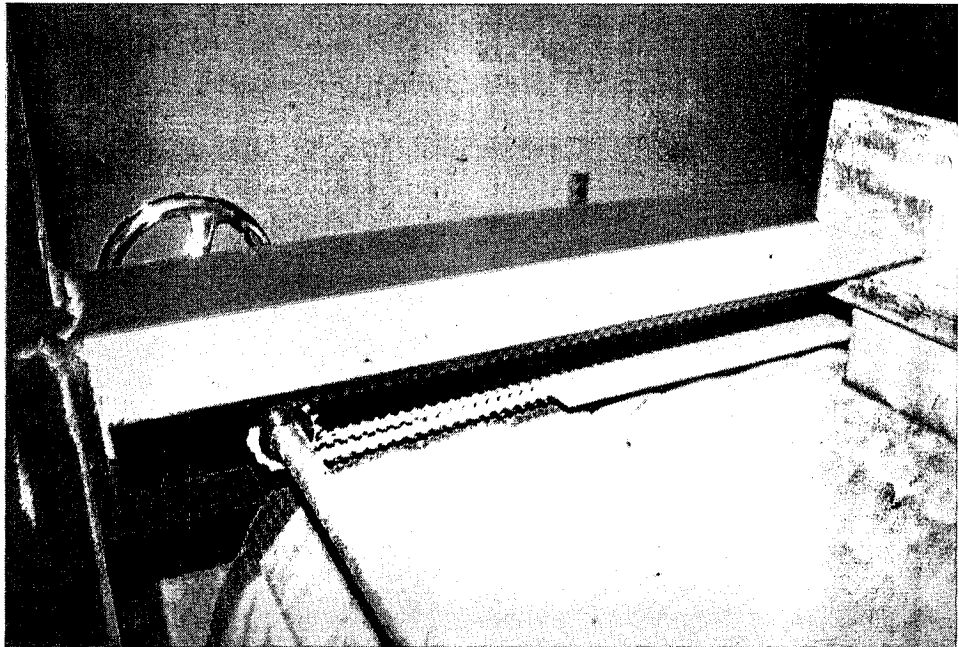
Workpiece Support with Timing Belt Mechanism.
